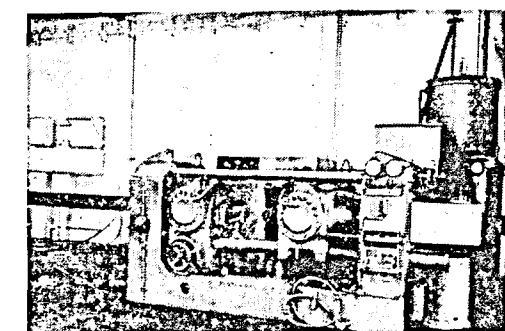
A.I. Patent Automatic Rail Welder.
